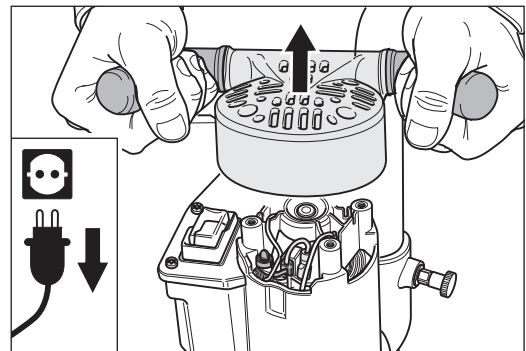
Remove the handle. Make sure that no parts fall into the motor!
